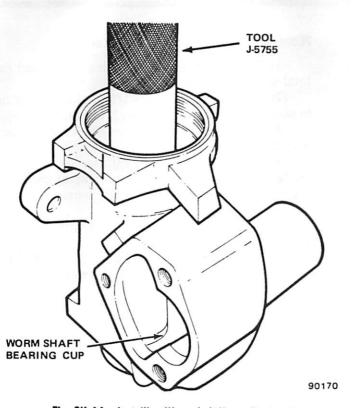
K-14 Installing Wormshaft Upper Bearing Cup
